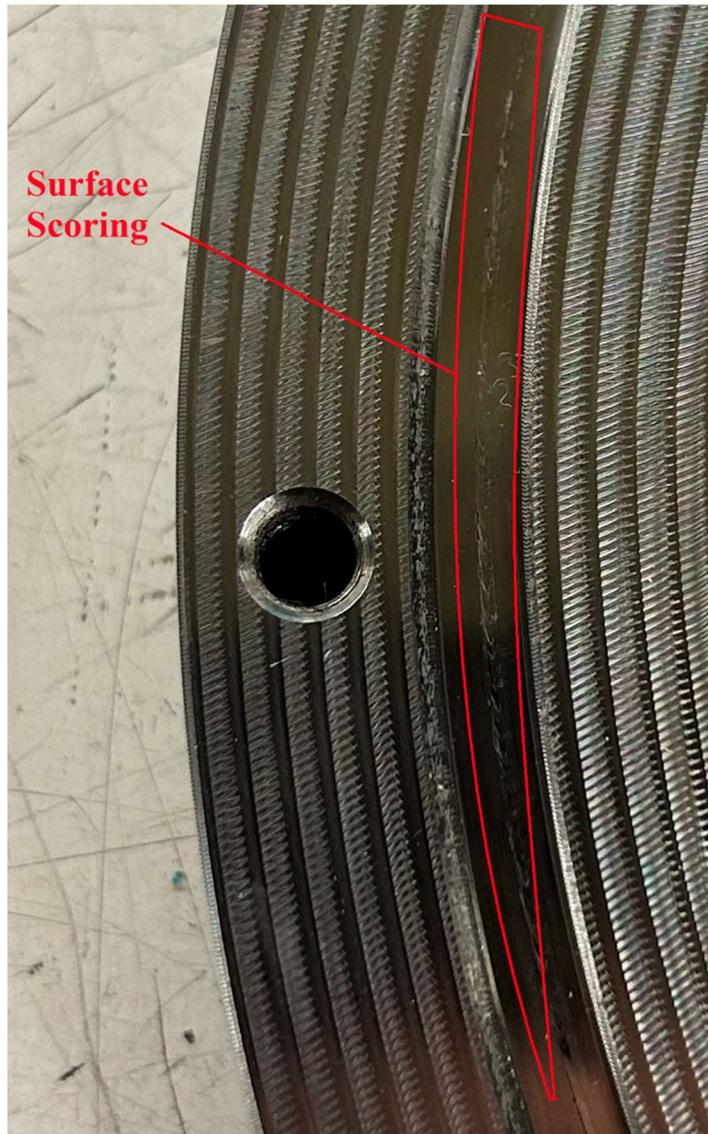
Surface Scoring on the Sealing Surface of the 17-4 Stainless Steel Plate
